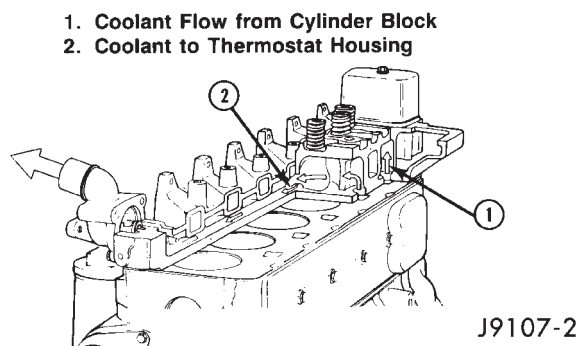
Cylinder Head Coolant Routing—Diesel Engine
